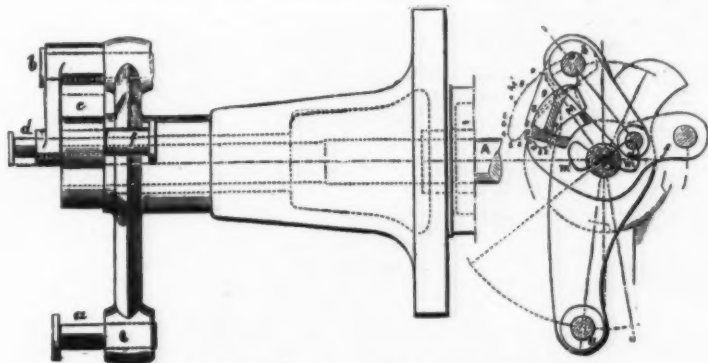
THE FRIKART-CORLISS VALVE GEAR.
